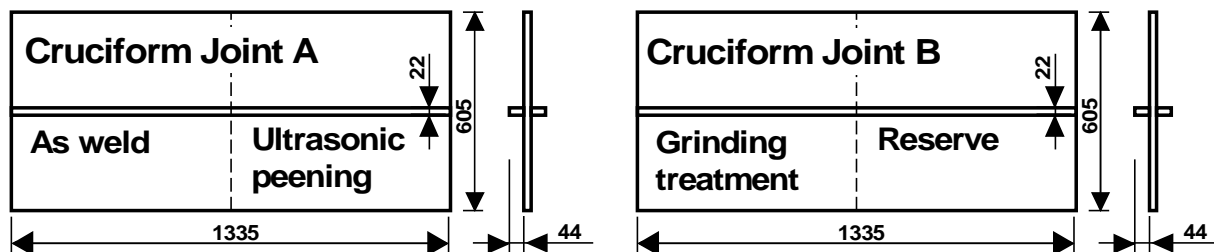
Size and shape of cruciform Joint (Unit: mm).
